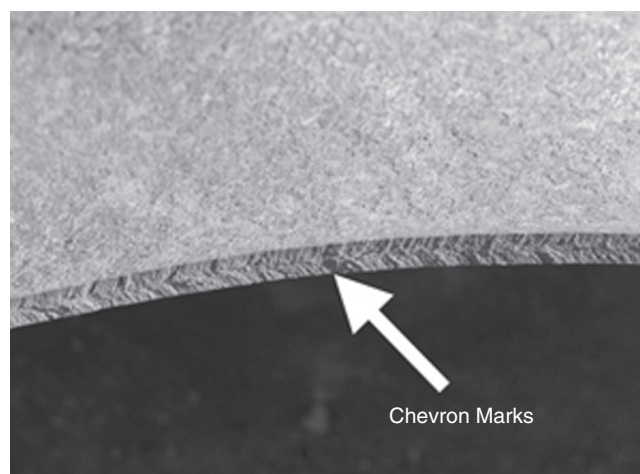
Brittle flat fracture surface on incorrectly heat-treated valve stem.<sup>17</sup>
